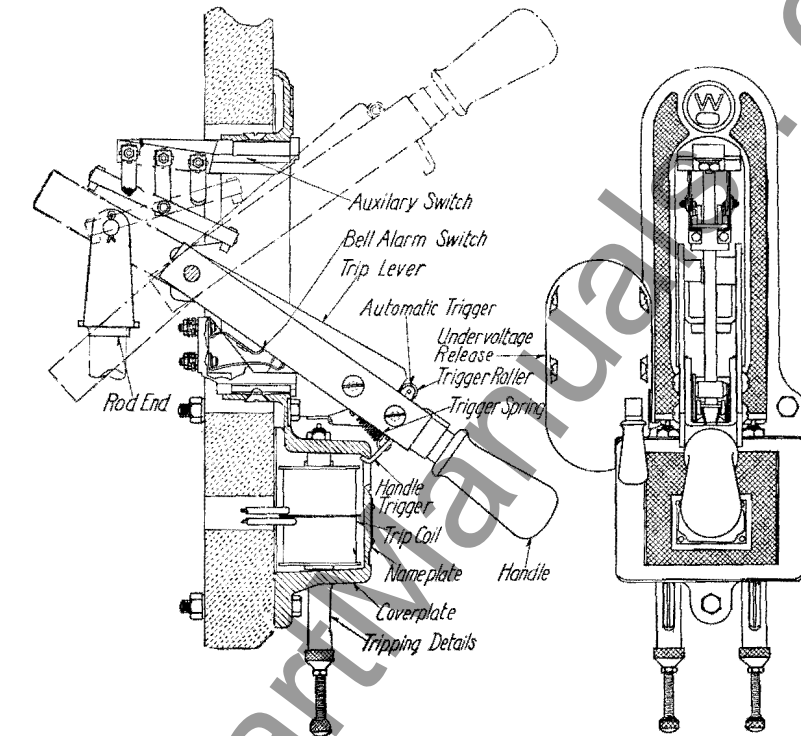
SINGLE HANDLE 2-COIL COVERPLATE
